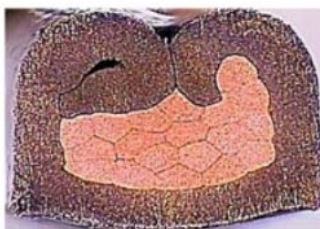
Example of Acceptable Wire Crimp - Stamped & Formed Connectors
